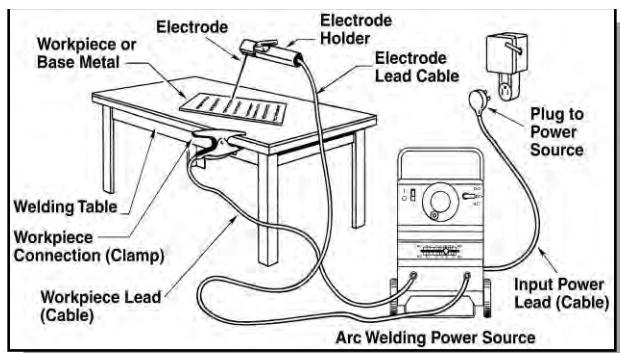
Lincorn electric SMAW Stick Welding.
